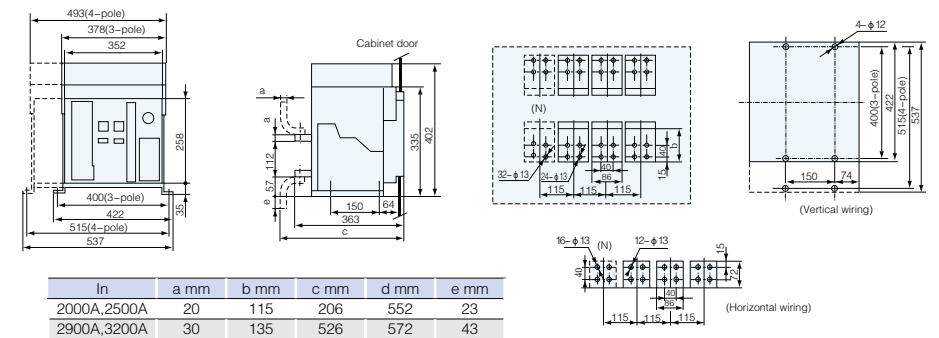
overall and mounting dimensions of fixed type breaker (OW18-3200, 3200/4)
